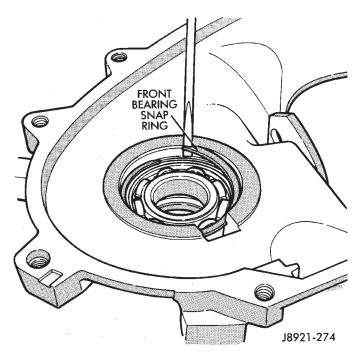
Removing/Installing Front Output Shaft Front Bearing Snap Ring
